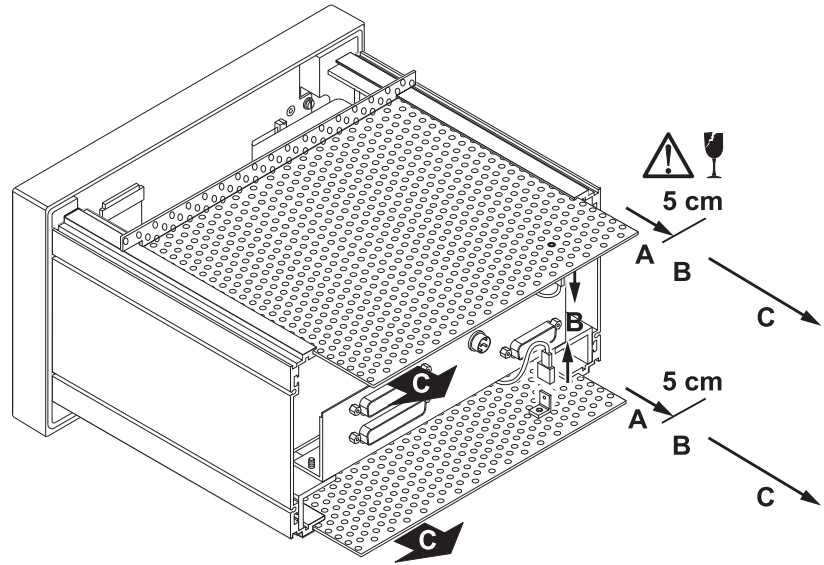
Loosening of the ground cables and removing the cover plates
